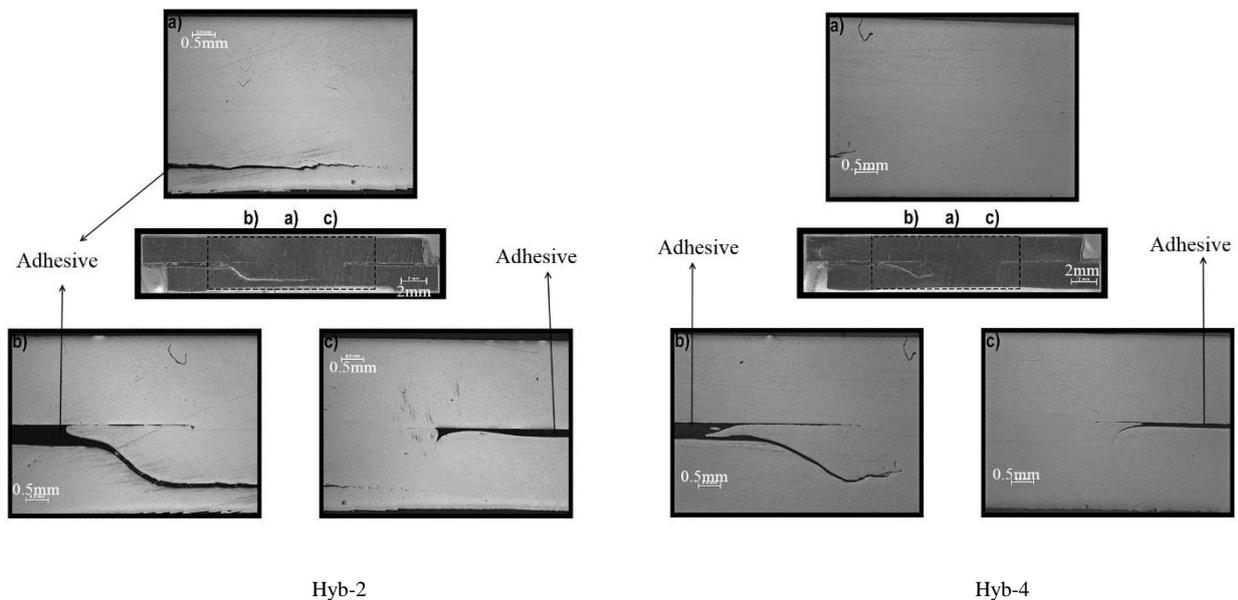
Macroscopic and microscopic figures of the Hyb-2 and Hyb-4 weld cross sections; a) center of the weld, b) retreating side and c) advancing side.
